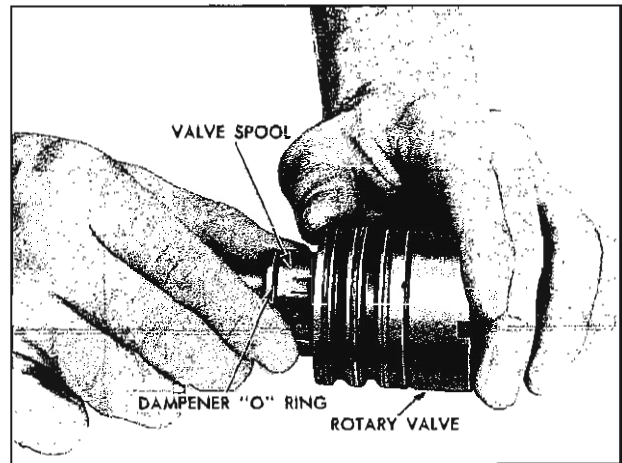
A-15 Removing Valve Spool from Rotary Valve
